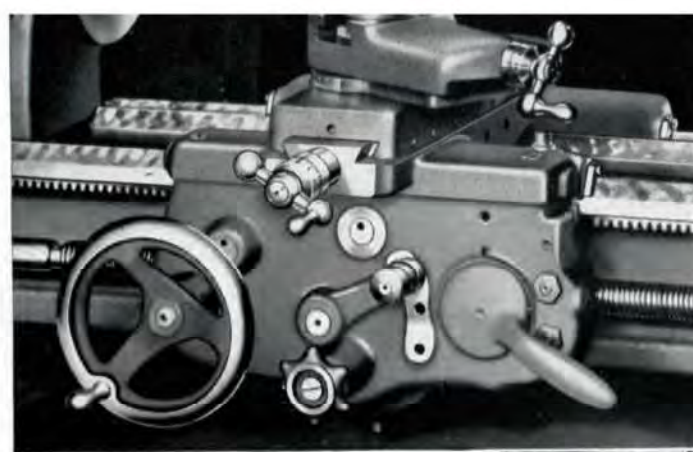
Above—Power Feed Apron for Model A and Model B 9-inch South Bend Lathes
